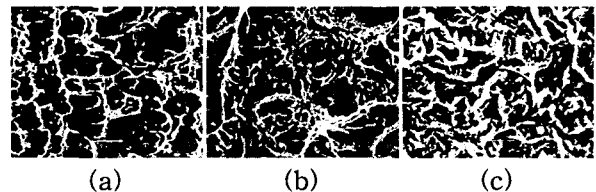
SEM fractographs of weld CVN specimens(x2,000). (heat input : 3.2kJ/mm) (a) 20℃, (b) -90℃ and (c) -190℃
